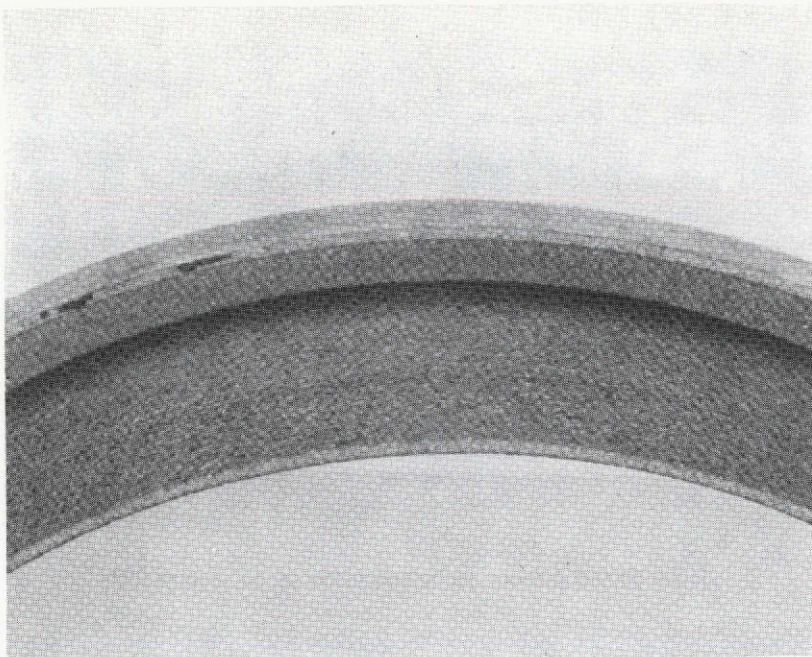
Upstream side of anode pole piece insert, before test, showing tantalum plasma-sprayed interior surfaces.
